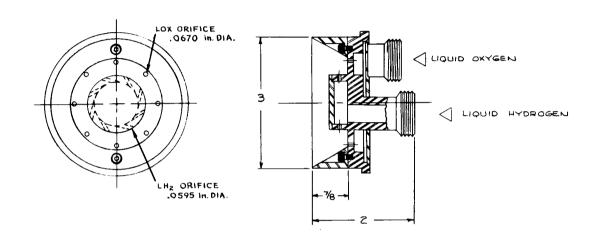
IMPINGING-VORTEX INJECTOR ASSEMBLY
